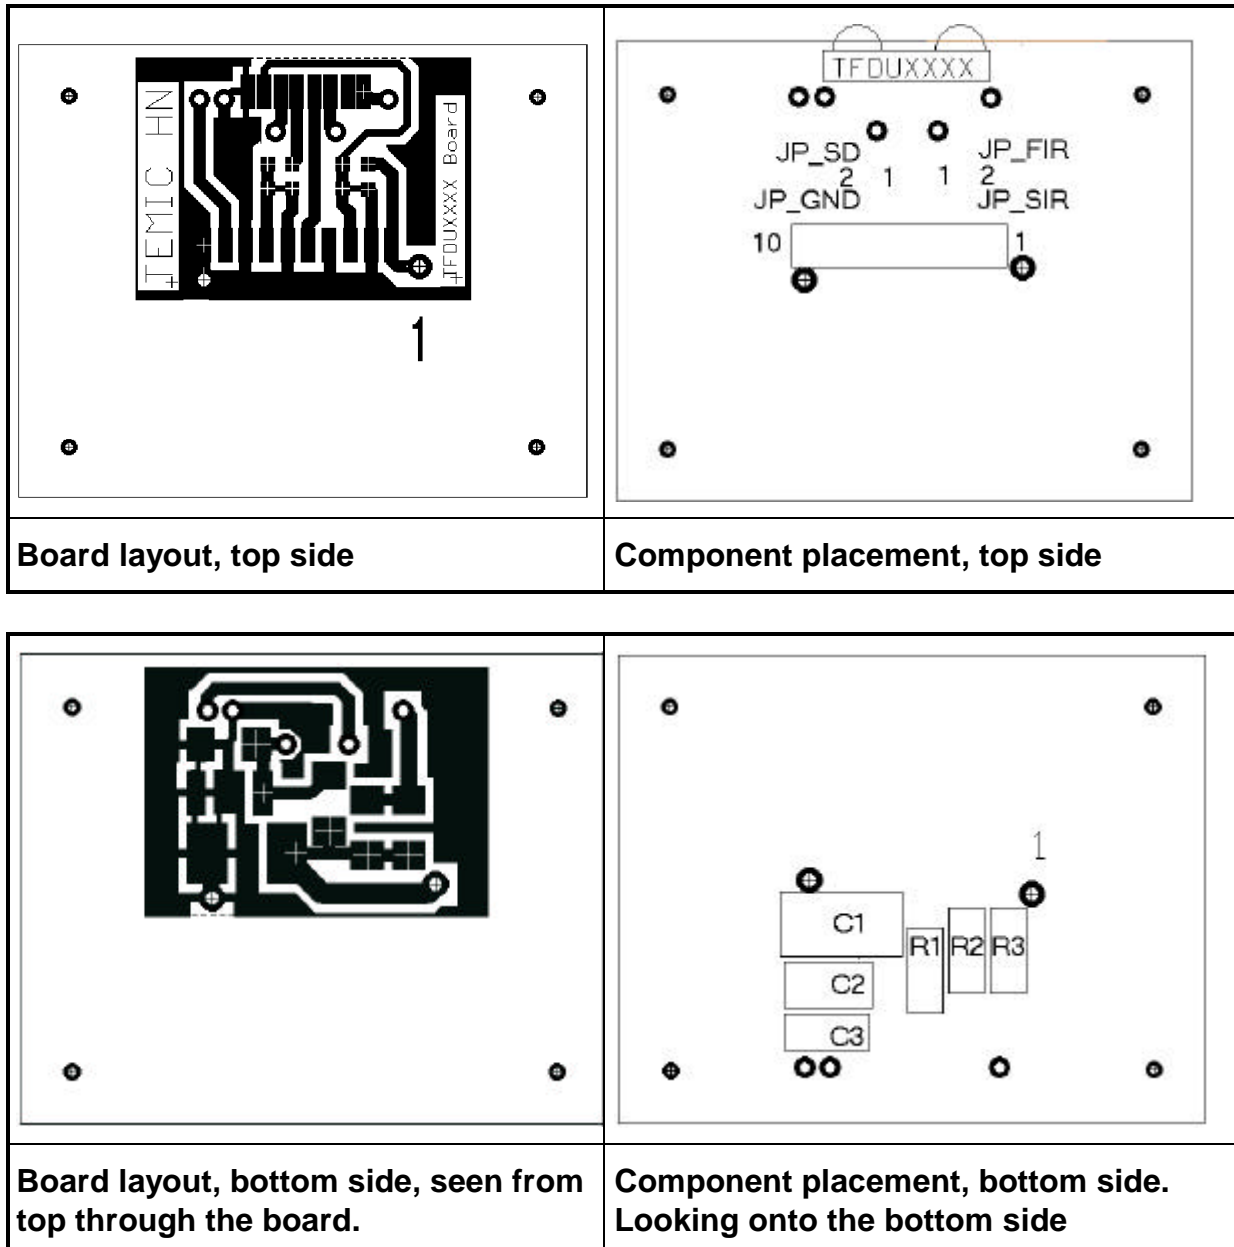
Universal transceiver board layout, the transceiver can be soldered for top and side-view applications.
